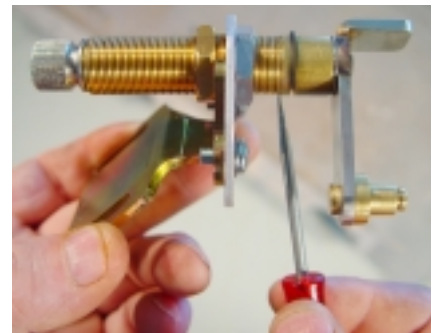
The other primary, up and down, adjustment is by loosening the two phillips head screws of the aluminum Pivot Shaft Holding Plate so it can be adjusted.
